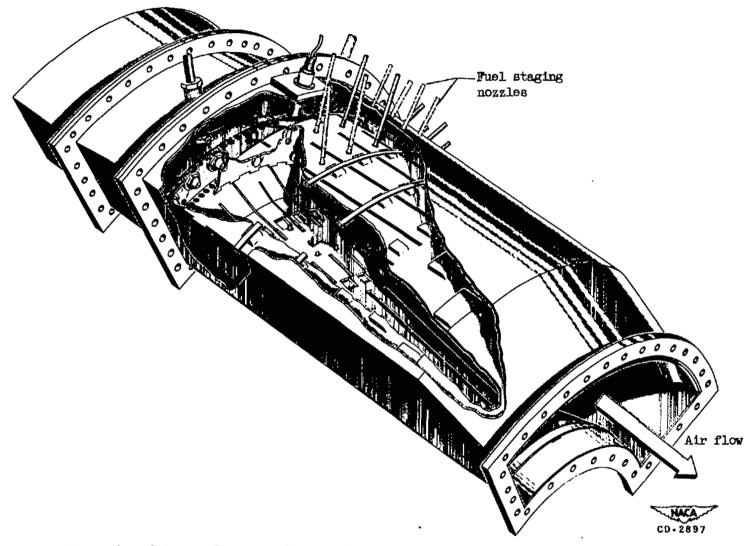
Cutaway of one-quarter annulus combustor assembled in outer housing showing provisions for injecting staged fuel.
